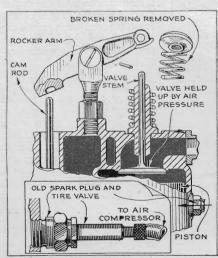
Air pressure used to make a quick change of valve springs on overhead motor.
